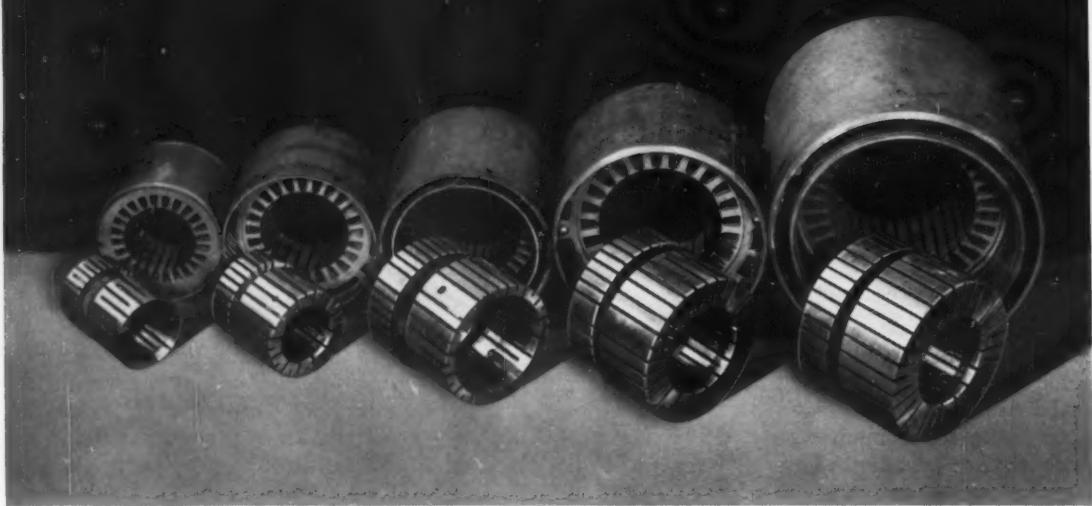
Five finish-machined motor frames showing the variations in length and bore sizes. In front of each frame is the appropriate expanding bushing to be placed on the arbor for holding and driving the part.
